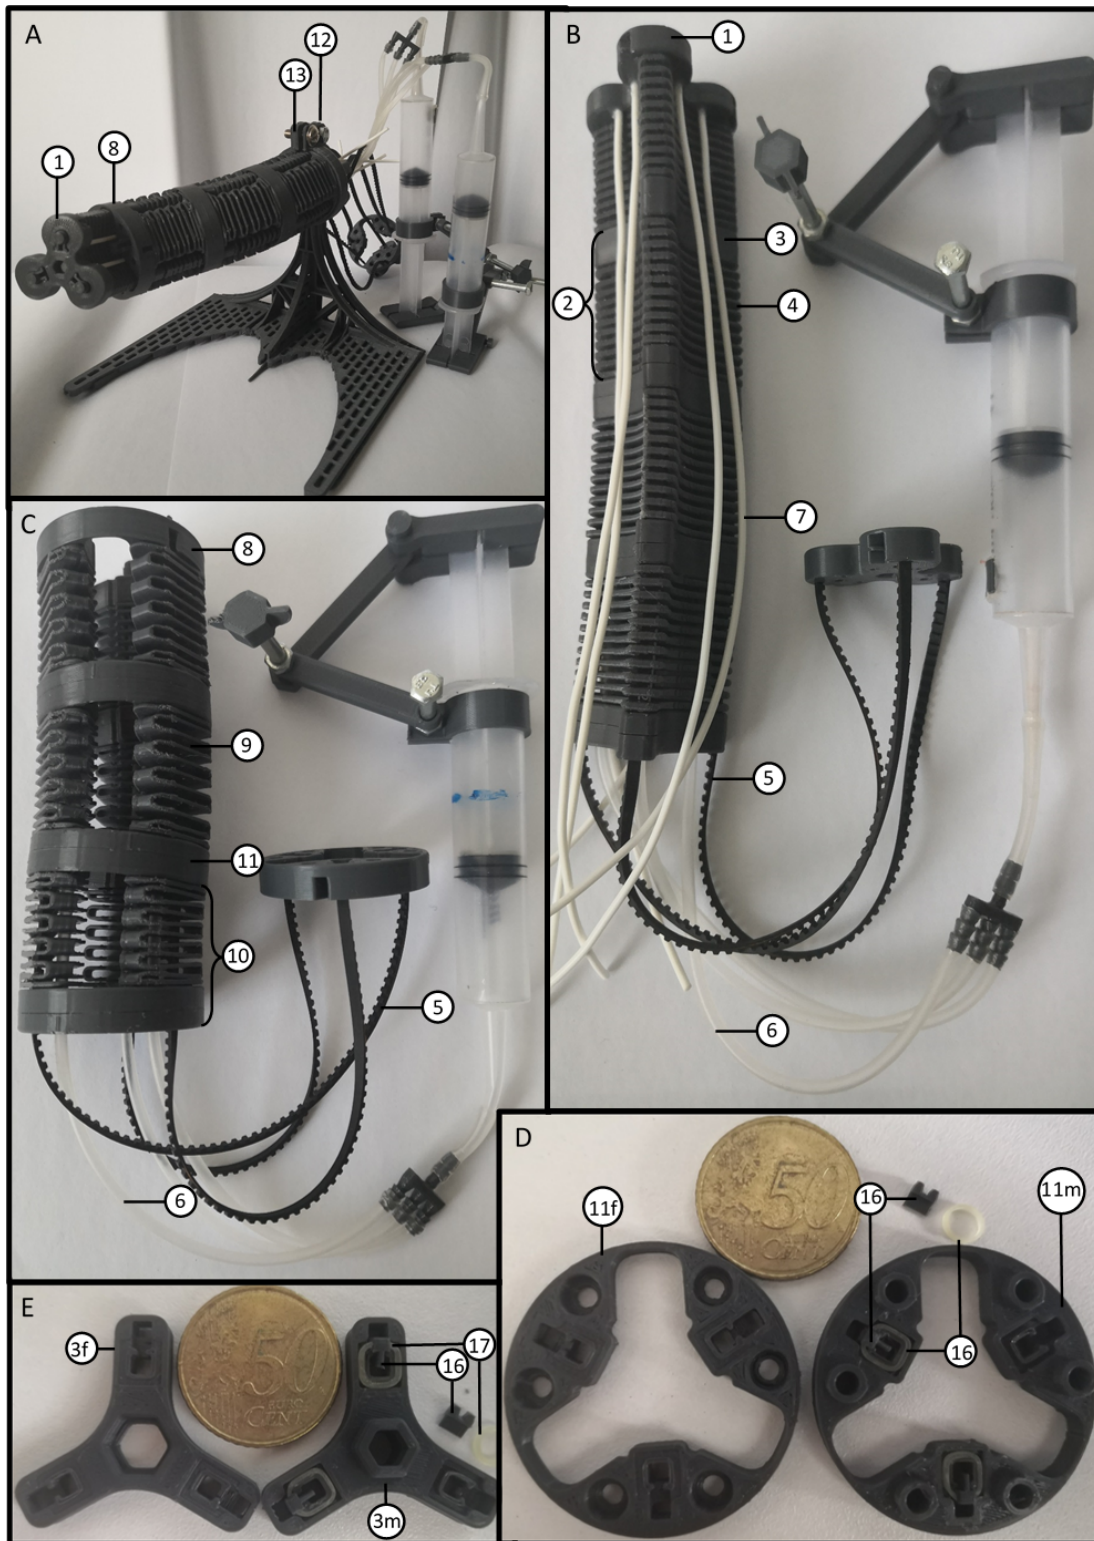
Pictures of the prototype parts before and after assembly. (A) The full assembly of both inner- and outer-shaft concentrically positioned and attached to their stands (12 and 13). (B) The assembled inner-shaft consisting of four segments (2). The segments have a disk (3) and joint (4) that contain channels for the timing belts (5) and air tubes (6). The timing belts, air tubes and guiding wires (7) are attached to the end-effector disk (1). (C) The assembled outer-shaft consisting of three segments (10) containing a disk (11) and joint (9). The end-effector disk (8) fixes the air tubes and timing belts. (D) The female (11f) and male (11m) part of the outer-shaft disk (11). The disk chambers three stoppers (16) wrapped with elastic bands (17). (E) The female (3f) and male (3m) part of the inner-shaft disk (3).
